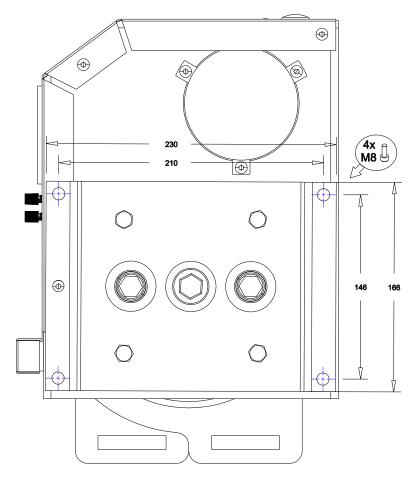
Mounting dimensions from bottom side. All dimensions in millimeters.
